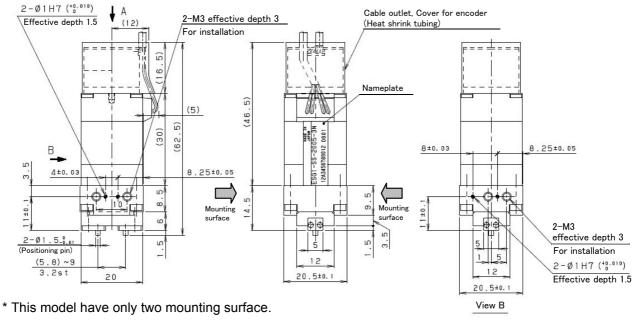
Outline drawing of the control unit (Single cam type 2)
